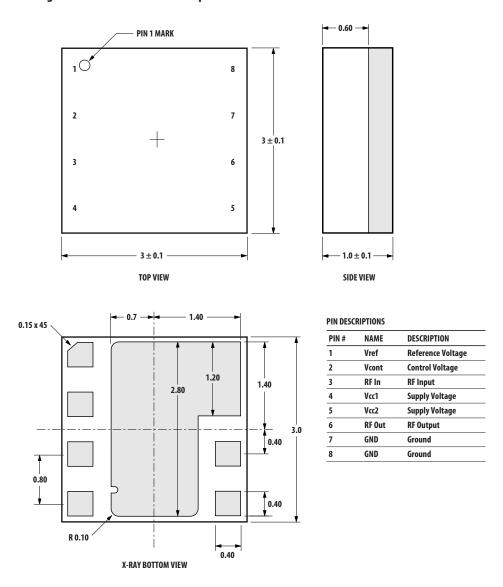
Package dimensional drawing and pin descriptions (all dimensions are in millimeters)
